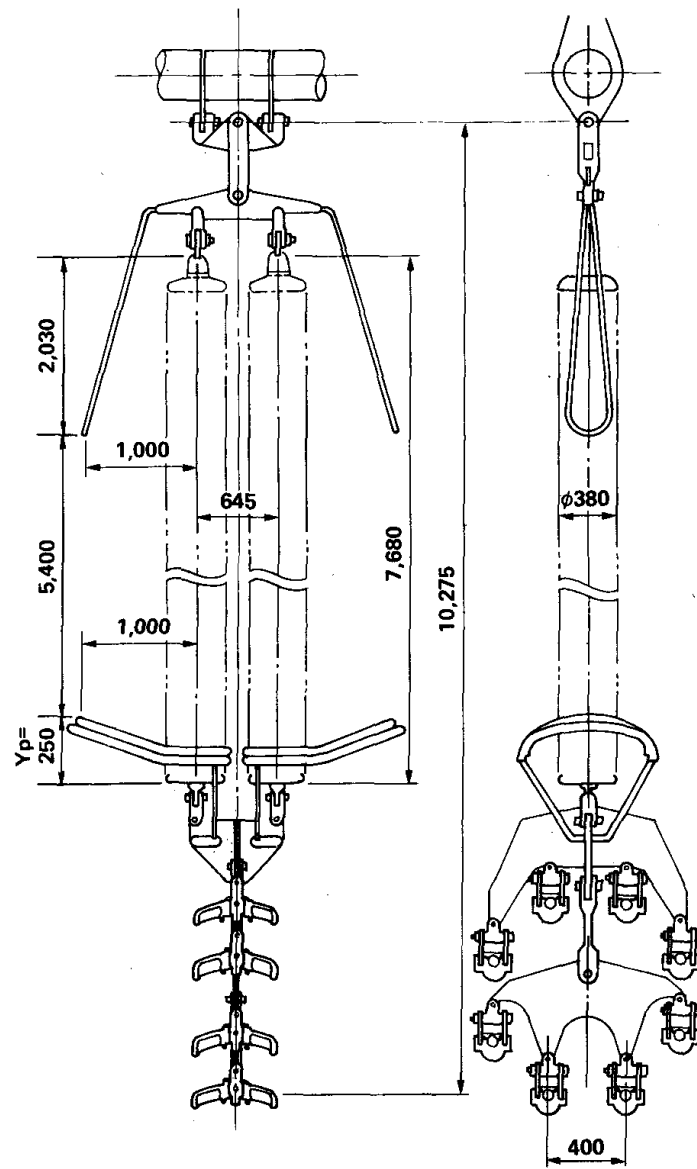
Suspension insulator assembly of a 1000 kV AC UHV transmission line [24]
